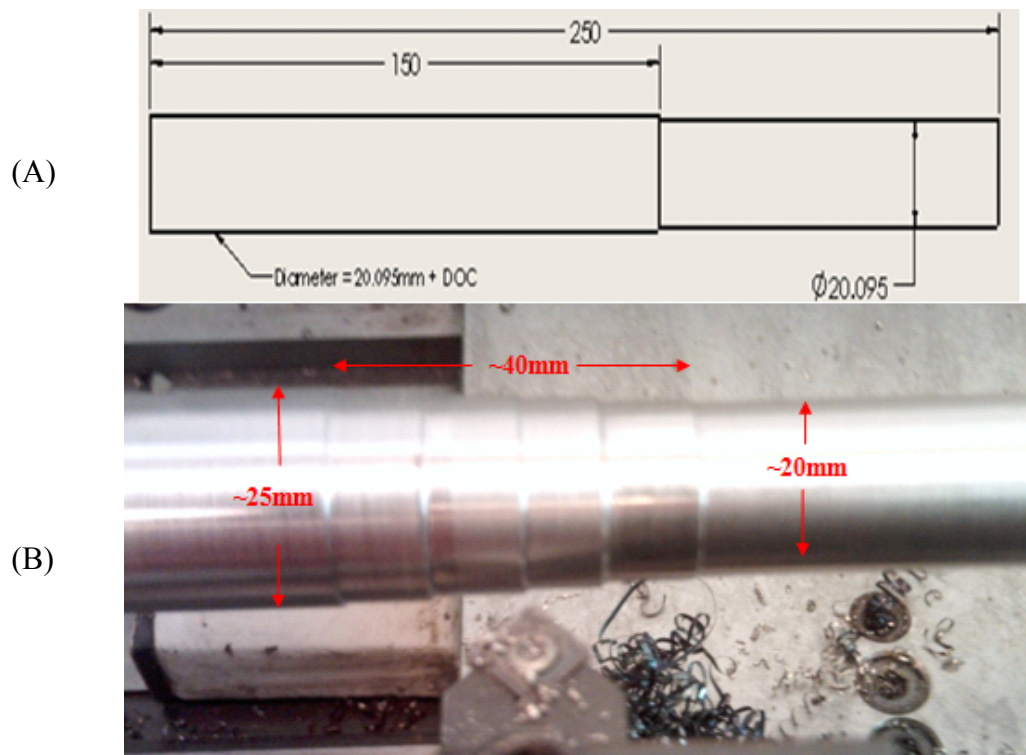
(A) Workpiece configuration for model in [24]; (B) Workpiece configuration for changing DOC tests used in experiment
